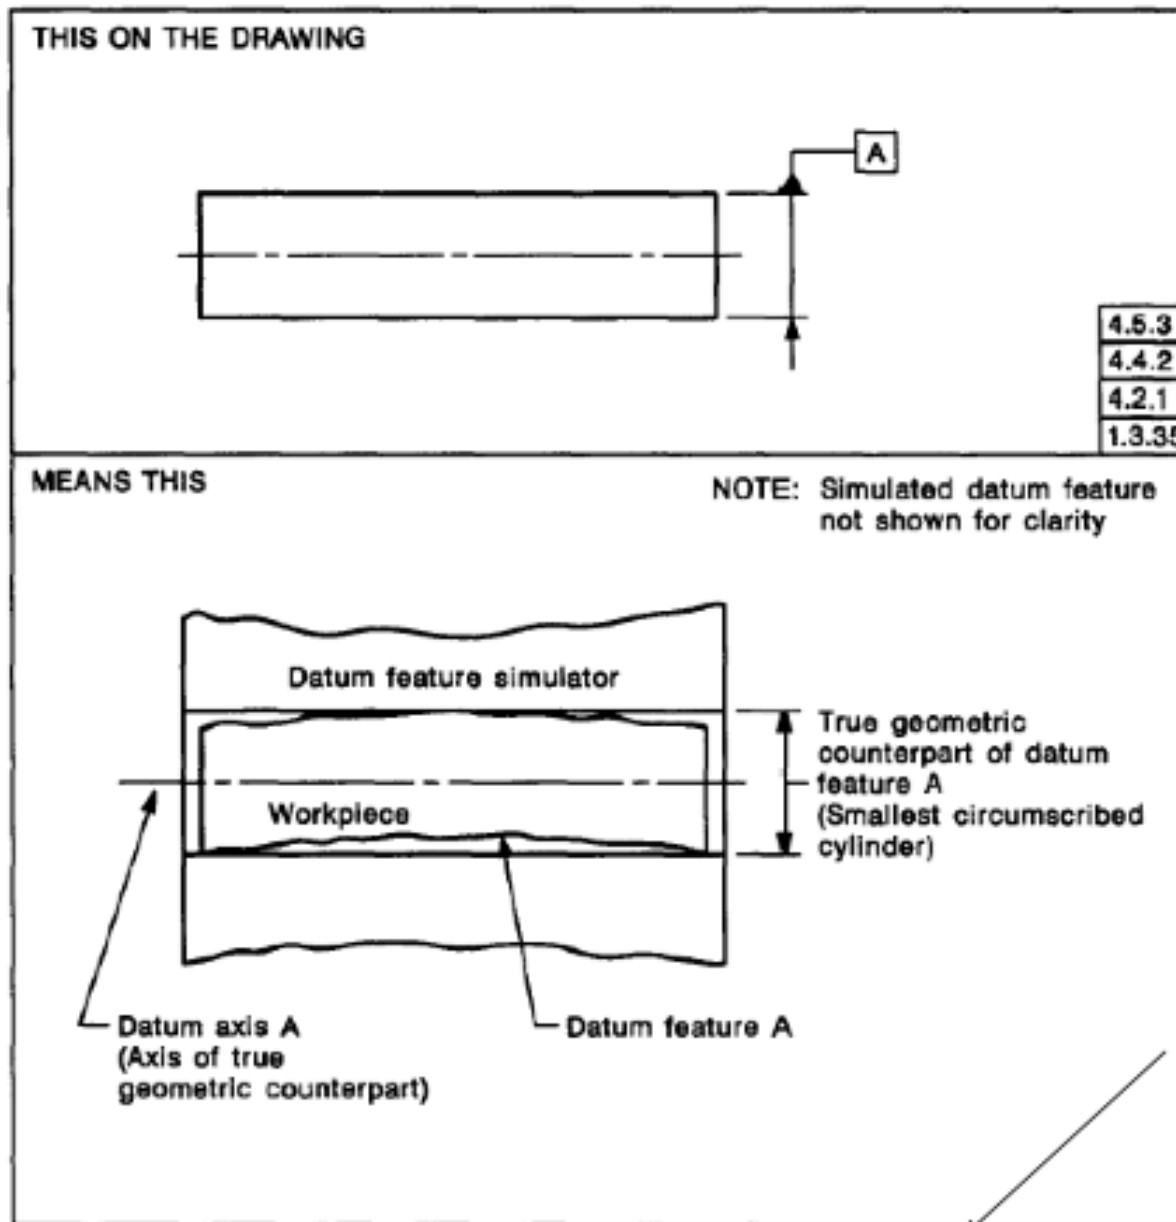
PRIMARY EXTERNAL DATUM DIAMETER — RFS
